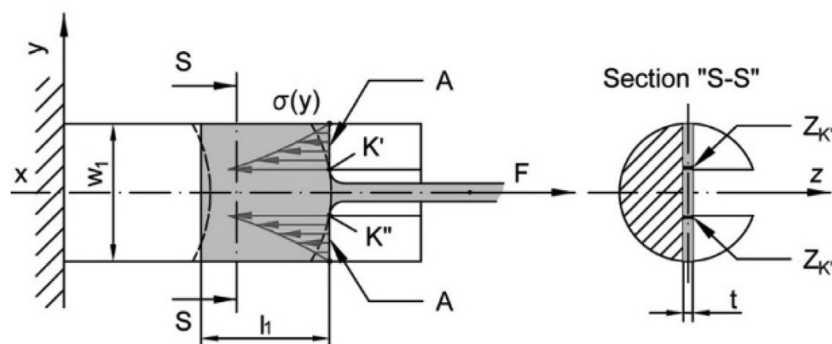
The clamping system: freely supported test specimen on SLTTD.
